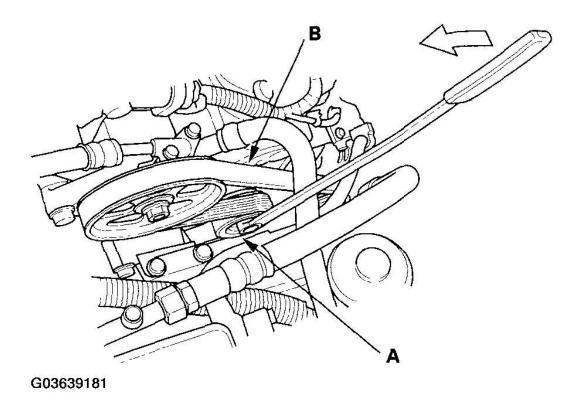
Moving Auto-Tensioner With Belt Tension Release Tool To Relieve Tension From Drive Belt
